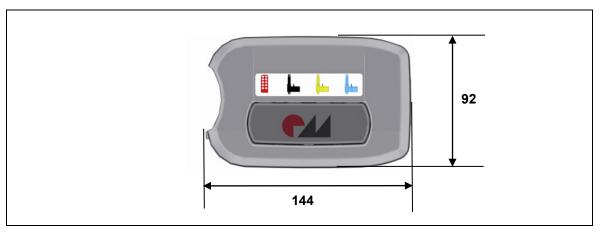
Dimensions of the MC10 control unit, front view (in mm)
